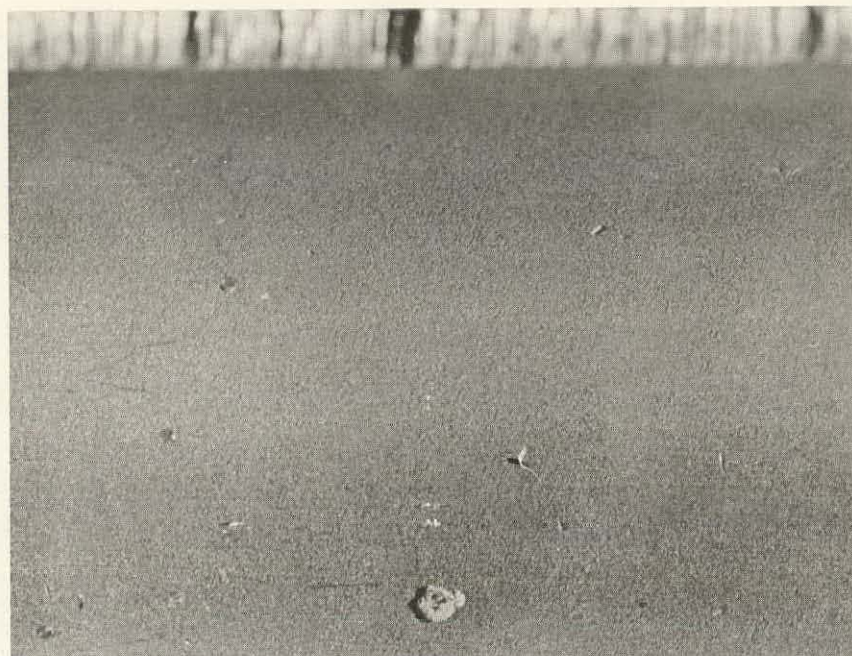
I.D. surface of 3003 Alclad control specimen (no cleaning) after a 3-month exposure. Note pitting corrosion.
